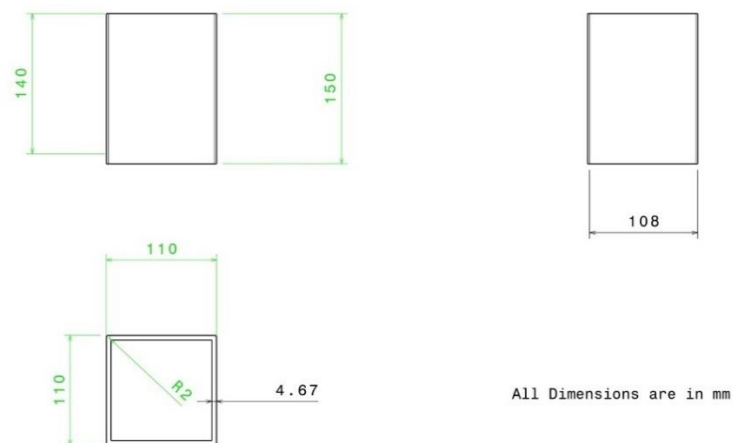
Isometric Drafted Views of Water Tank
